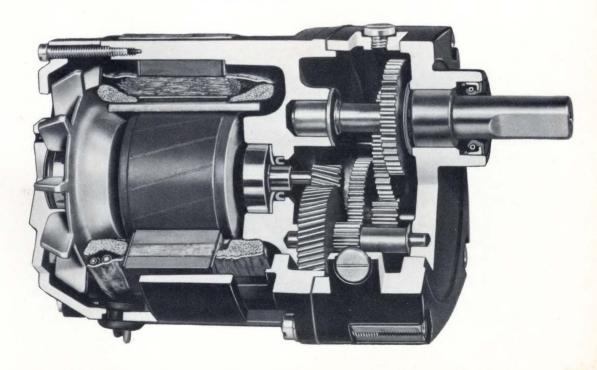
Bearing noise generally appears only in ball-bearing motors. Special noise-damped bearings, like those in this photo, can cut bearing noise.
